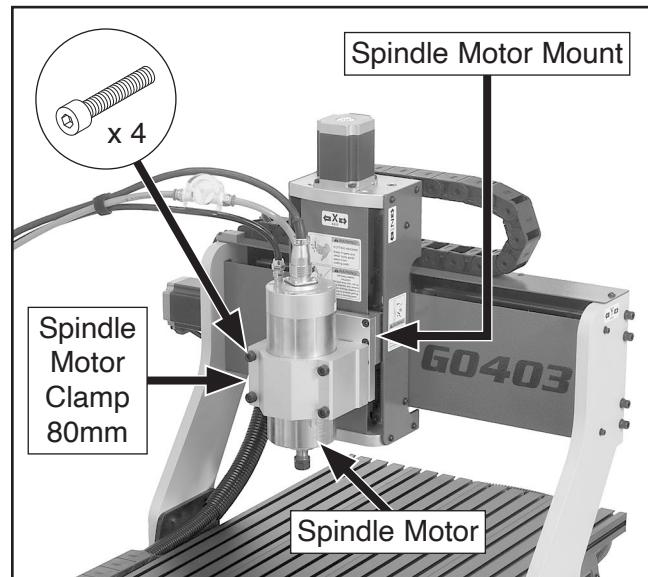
Spindle motor clamp (80mm) secured to Model G0403 spindle motor mount.
